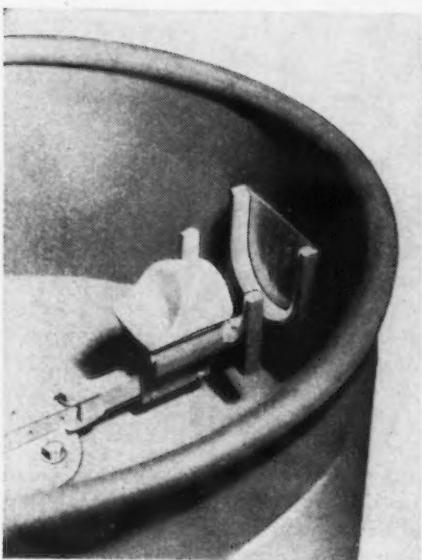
Showing the pivot arm mounting of crucible in an Ecco single flask centrifugal casting machine. (Flask not shown.)
